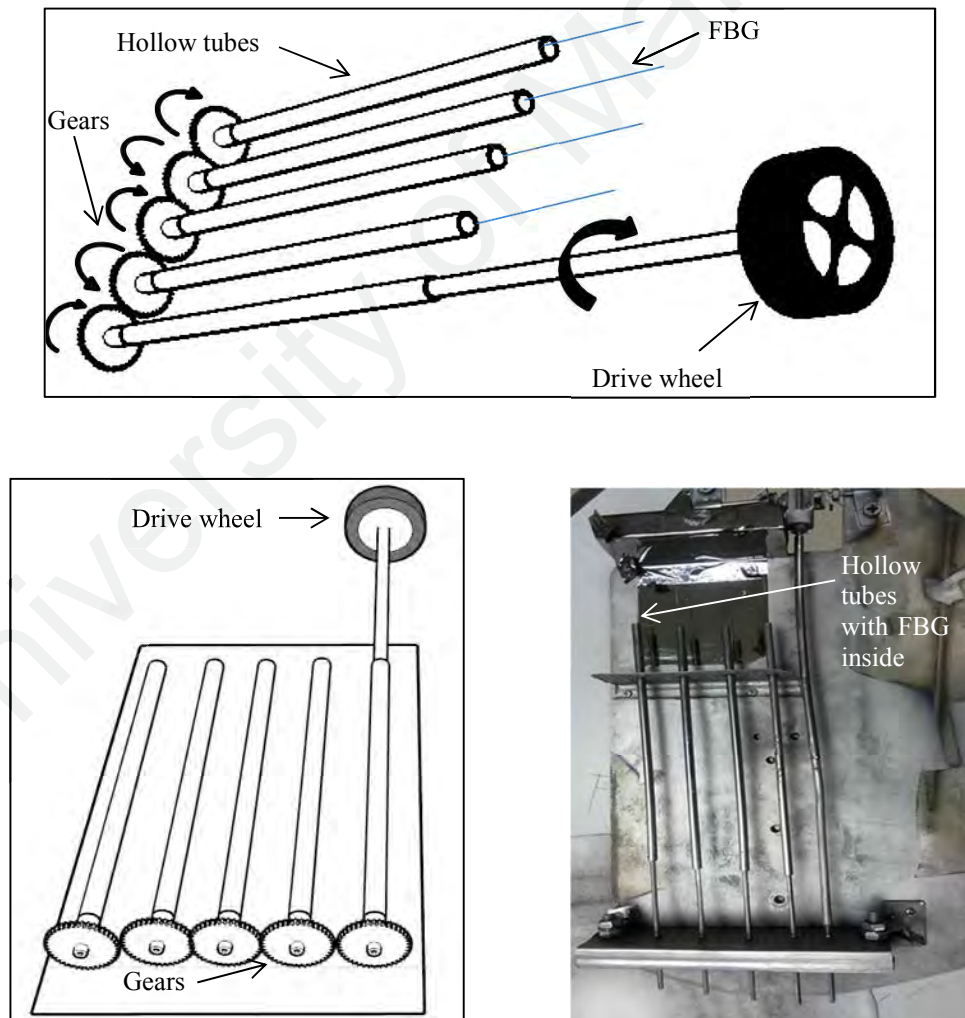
Rotator design (top), gear mechanism placement on a metal plate (bottom left) and actual rotator (bottom right) to be used inside PVD machine
